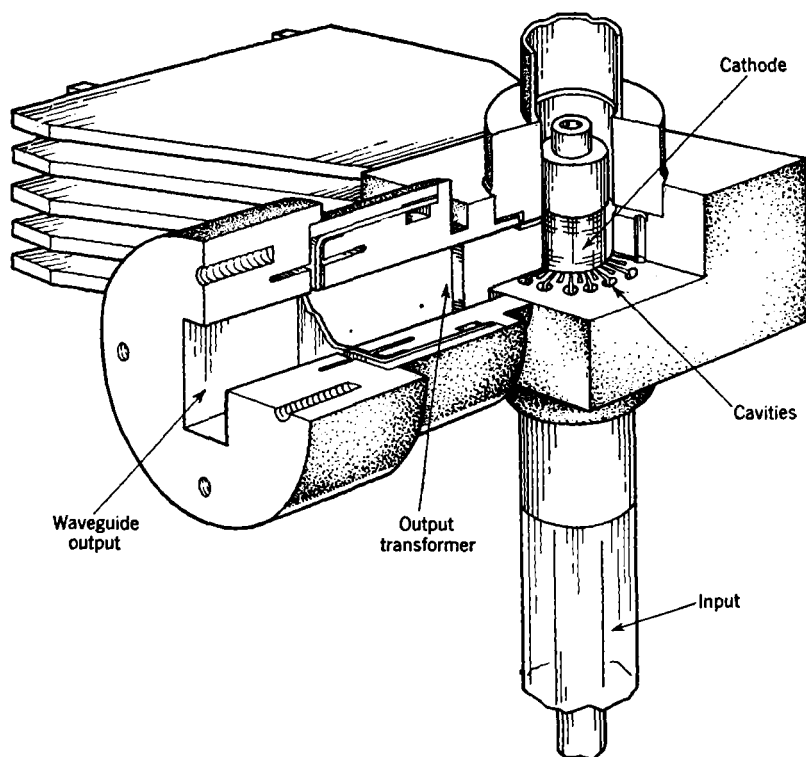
Cutaway view of 38-cavity rising-sun magnetron.
